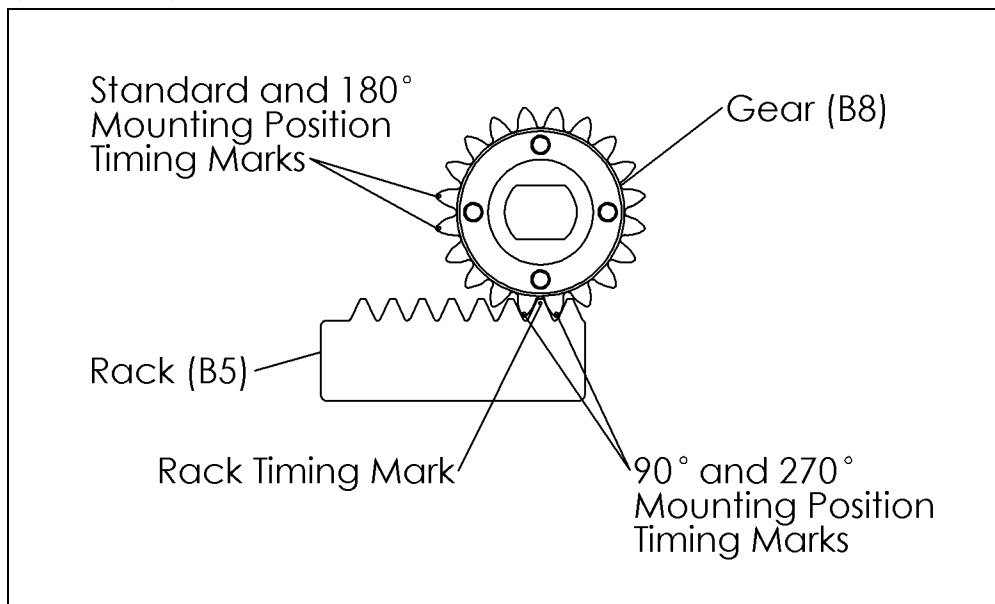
90° and 270° Mounting Position Gear and Rack Alignment
